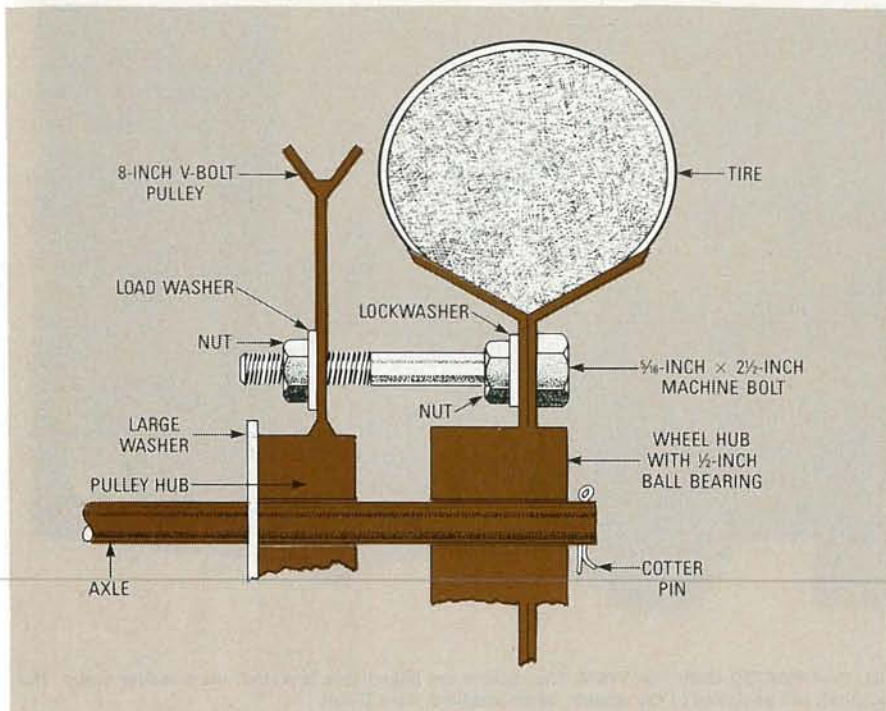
THE WHEEL AND PULLEY are bolted together and mounted on the wheel axle. The assembly is held in place with a cotter pin.
